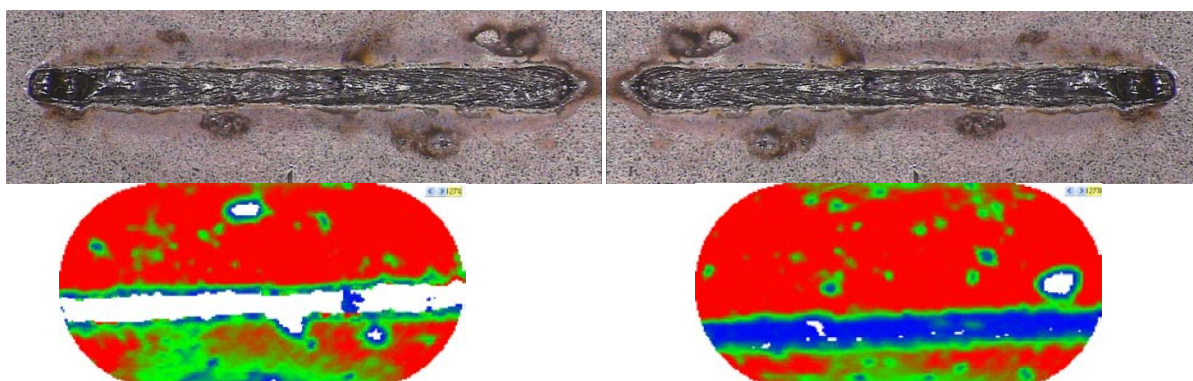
Weld top bead (0mm gap, sample D) and Amstech result from top bead (L) and bottom bead (R)
